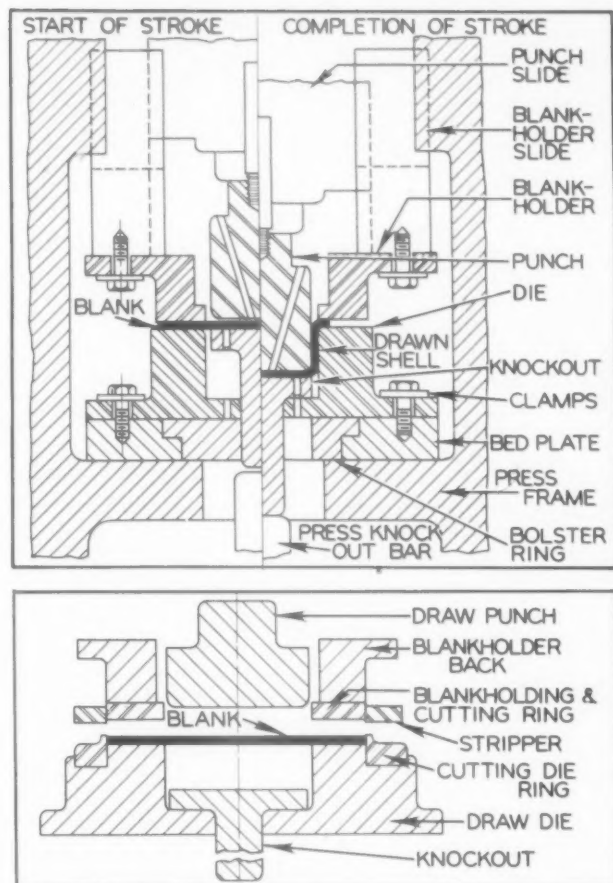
, at top, a draw tool installed in a double-action press, showing how the two slides operate the moving members of the tool—that is, the inner slide to which the punch is attached, and the outer slide which carries the blankholder. The die is clamped to the bed of the press, and the knockout is operated by a knockout bar from below the bed. On one side of the centerline, the blankholder is shown gripping the blank, with the punch just about to start the draw. The draw is shown completed on the other side of the centerline. The bolster ring in the bed plate provides support to the die and is made to suit the size of the die.
